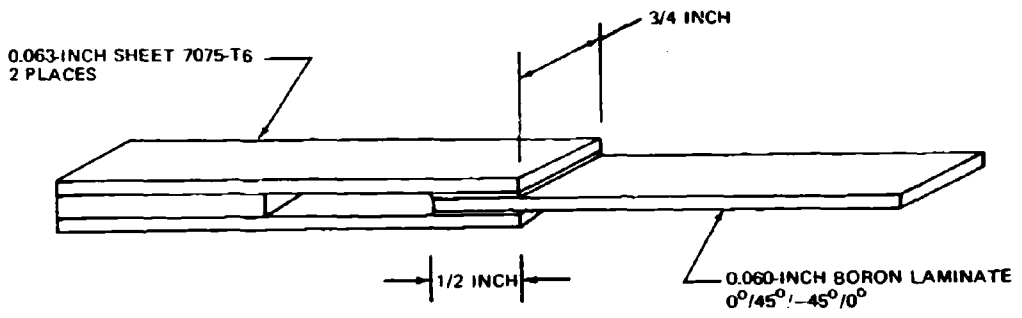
ADHESIVE SPECIMEN DIMENSIONS
